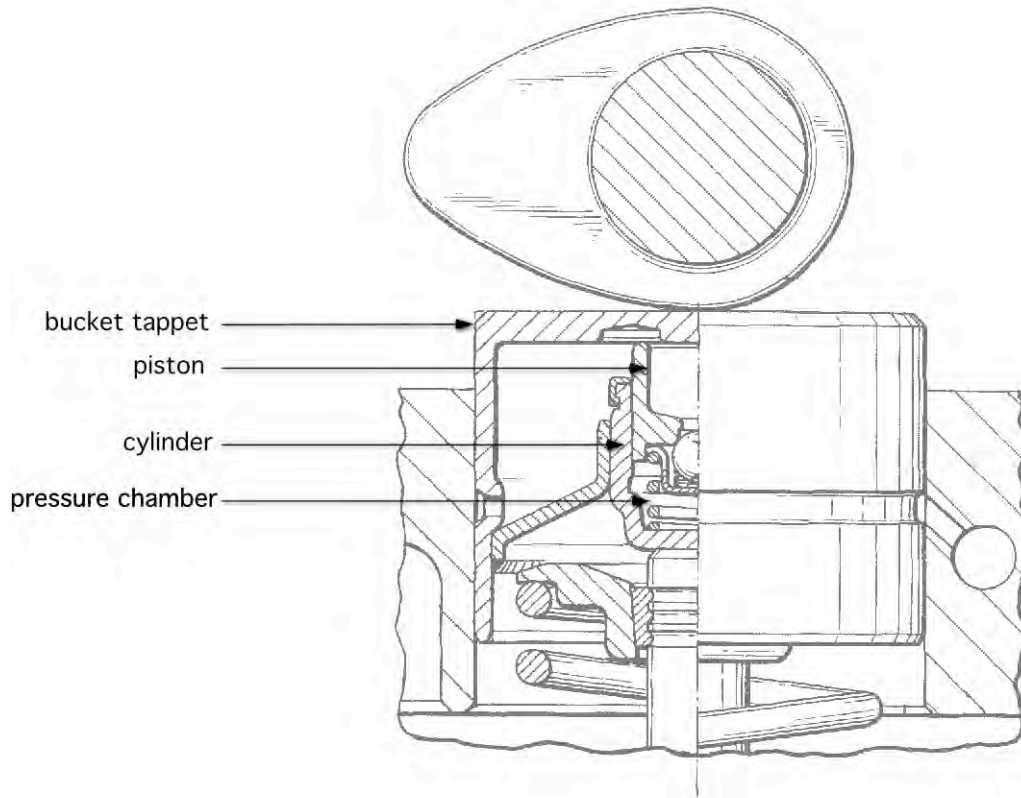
Bucket tappet for hydraulic valve lash adjustment of intake and exhaust valves of internal combustion engines.
